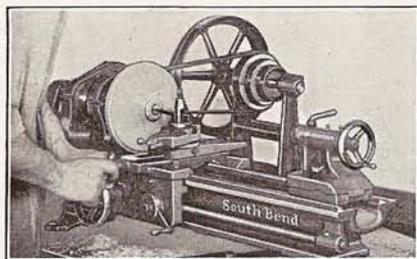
Boring a Wood Disc Held on the Face Plate of the Lathe.
